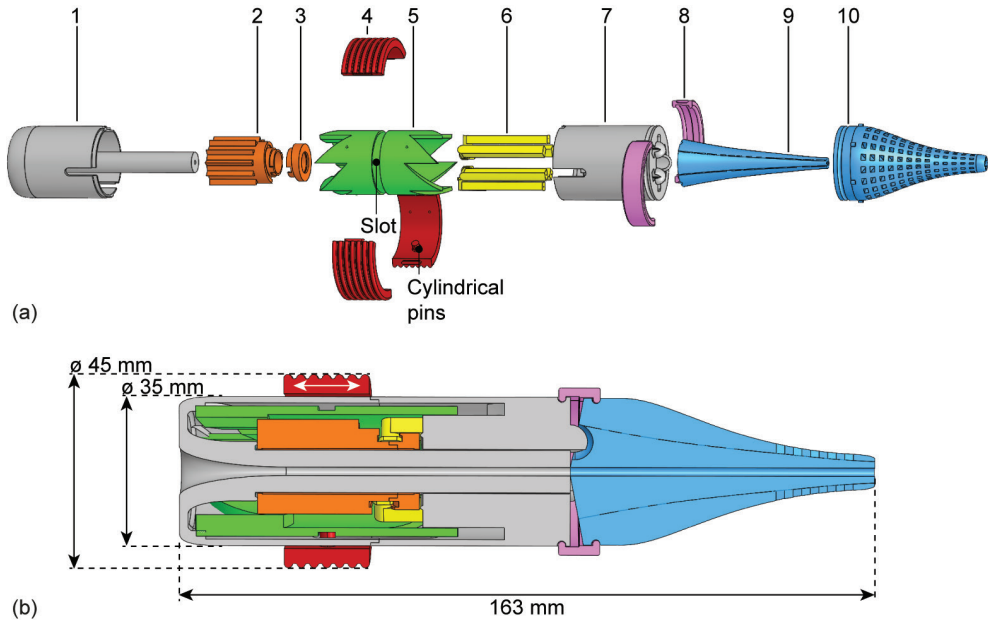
Exploded view (a) and cross-section (b) of the actuation unit of the Ovipositor MRI-Needle, consisting of a housing bottom (1), cam bottom (2), cam top (3), translation ring (4), selector (5), needle segment holder (6), housing top (7), lock ring (8), inner double cone (9), and outer double cone (10).
